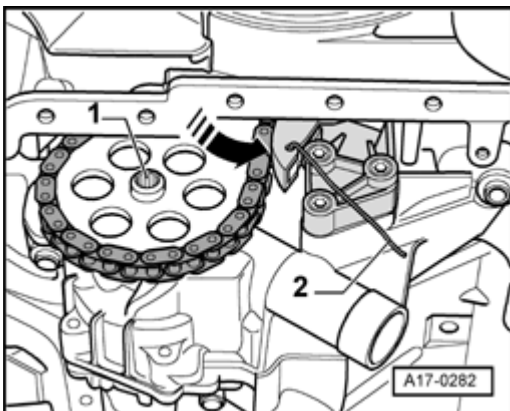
Securing Chain Tensioner For Oil Pump Using An Angled Piece Of Wire & Remove Bolt
